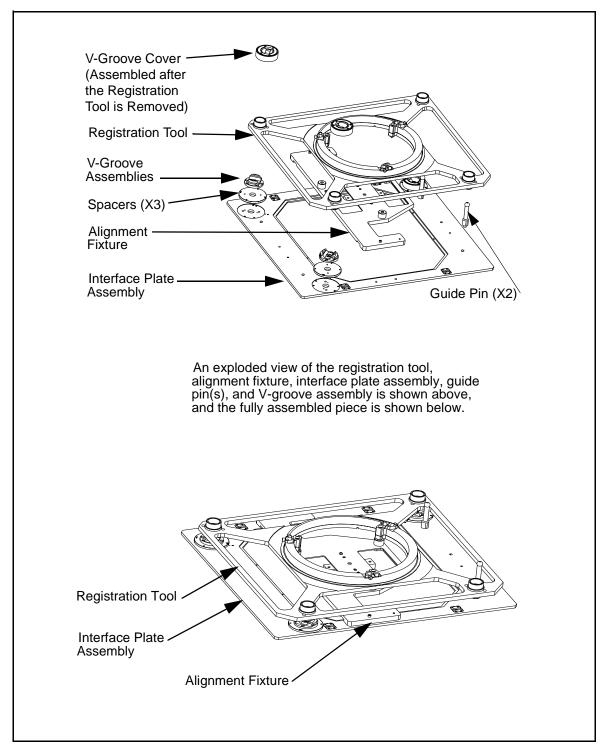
Registration Tool in Place on the Interface Plate Assembly
